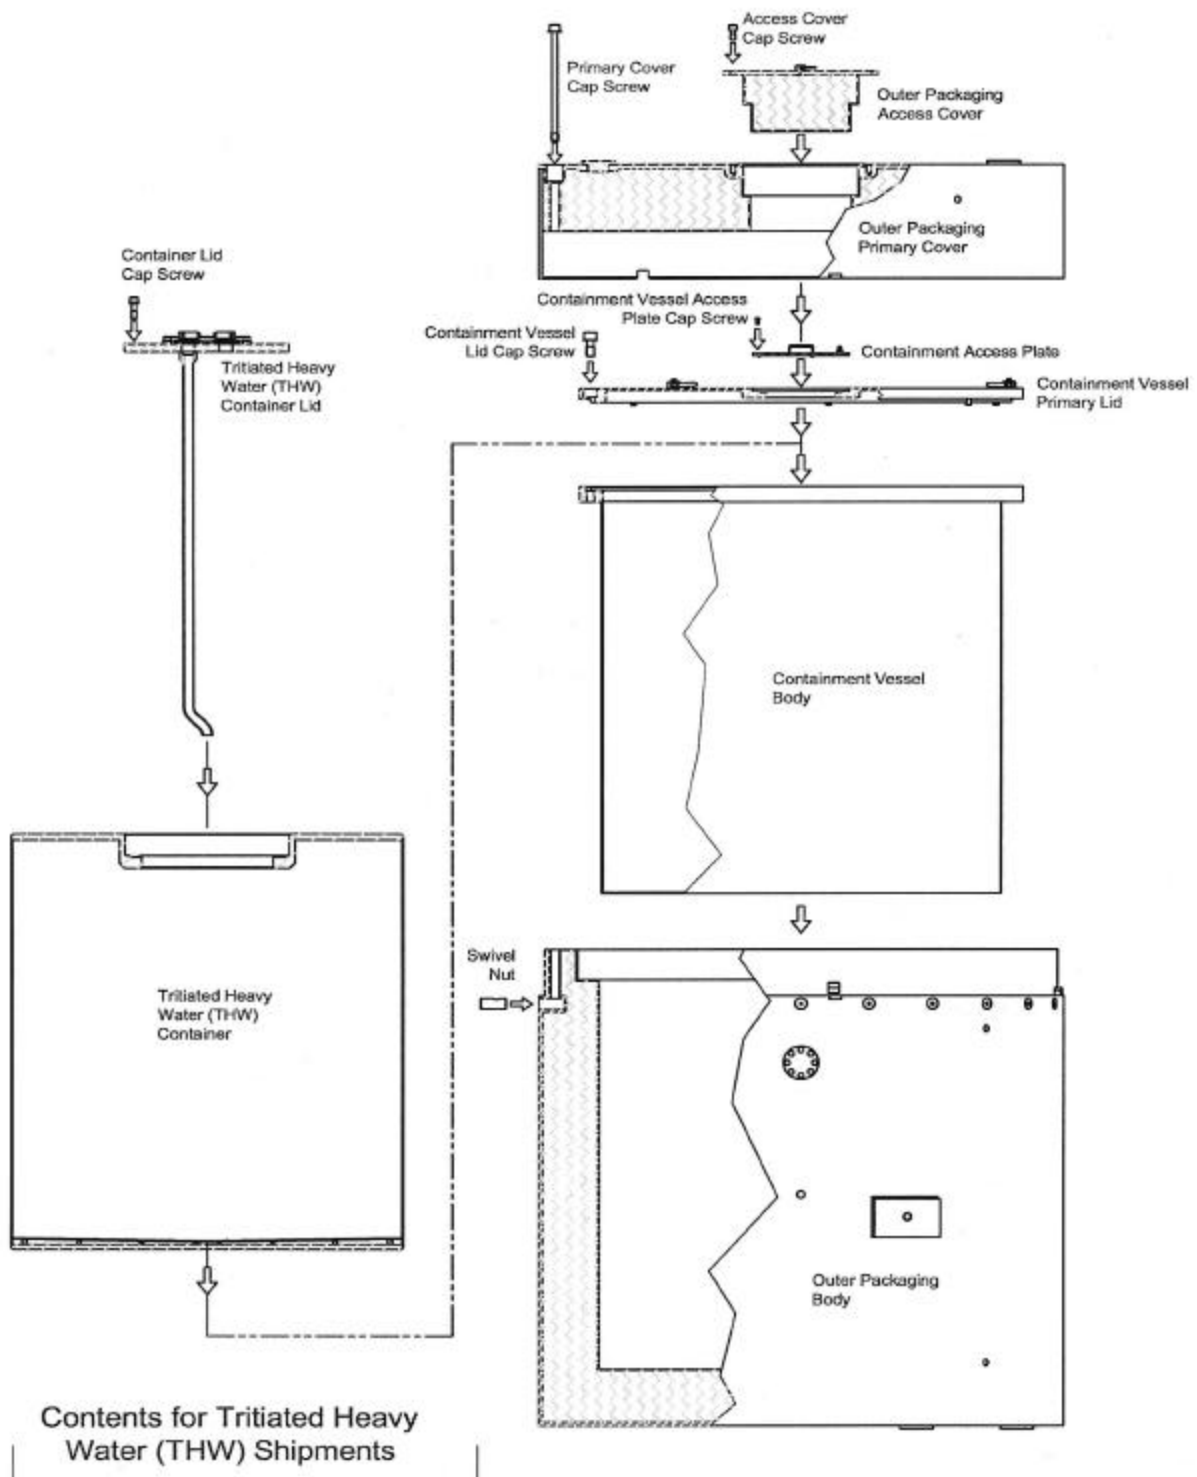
Multi-Purpose Transportation Package – Exploded Arrangement for Tritiated Heavy Water Payload (Configuration 1)
